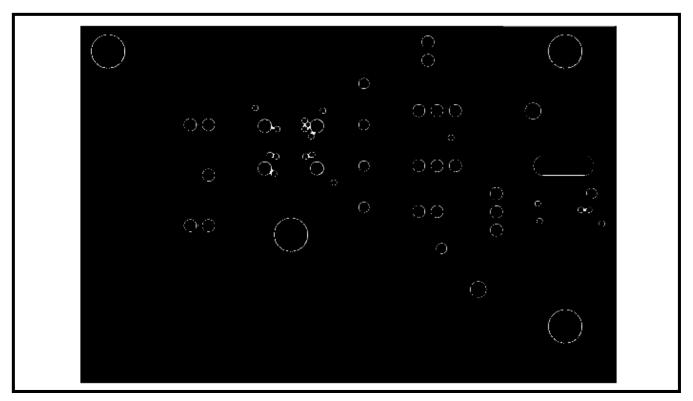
MAX3942 EV Kit PC Board Layout—Ground Plane
